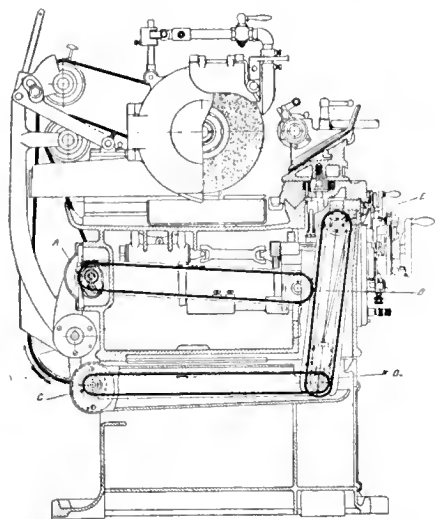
NEW CONSTANT SPEED DRIVE PLAIN GRINDING MACHINE.
